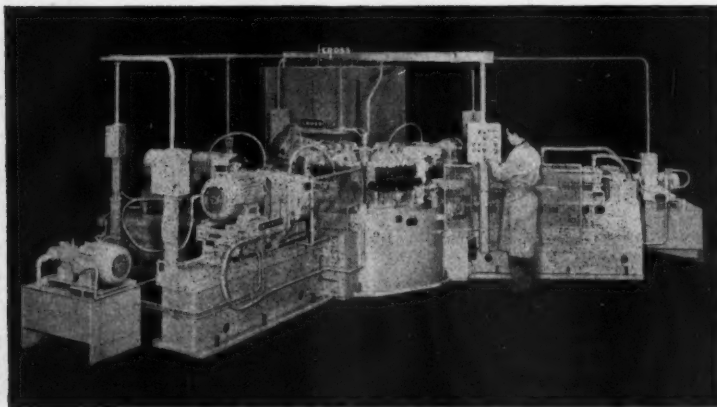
Cross rotary indexing table machine for drilling, chamfering and broaching connecting rods
